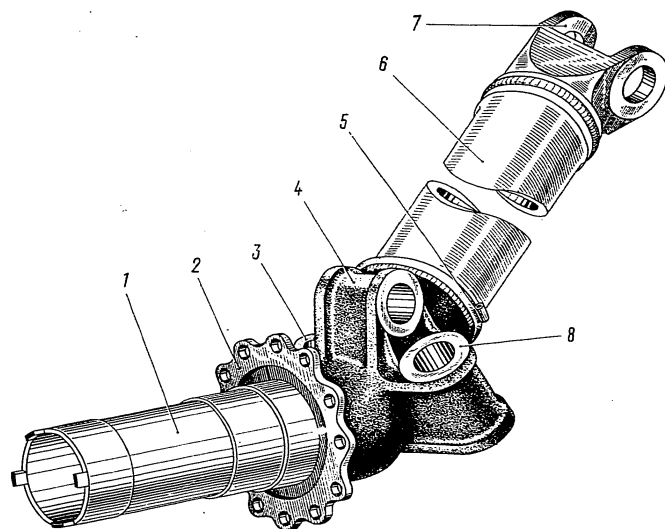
MAIN LANDING GEAR AXLE SHAFT
